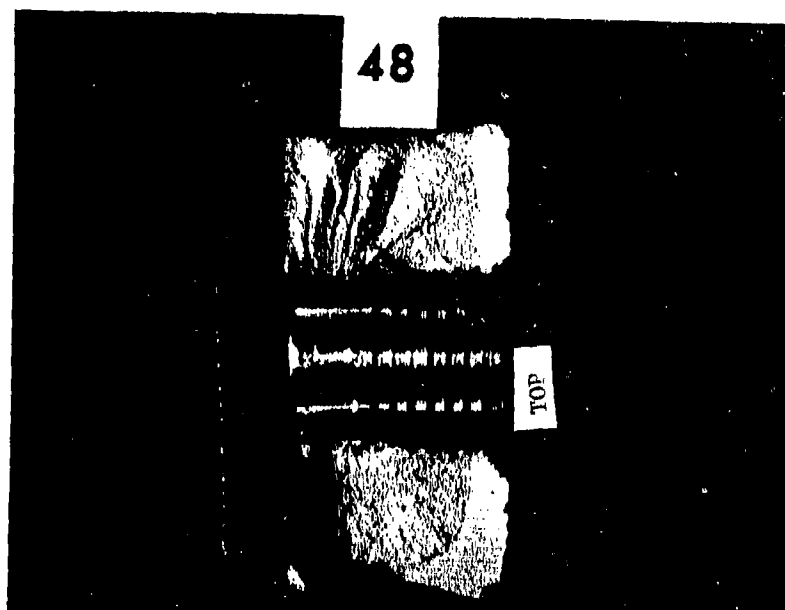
Close-up of Fatigue Failure of Specimens with Groov-Pin Size Inserts. Inserts Installed by Manufacture. Torqued Bolts in Inserts During Test.
